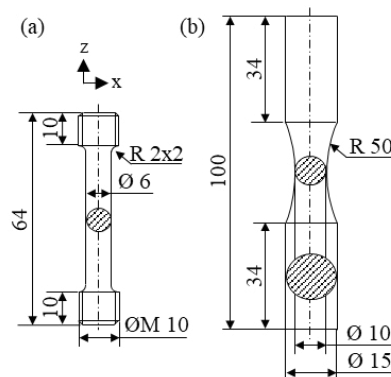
Specimens' geometry; (a) tensile test; (b) rotating bending test.
